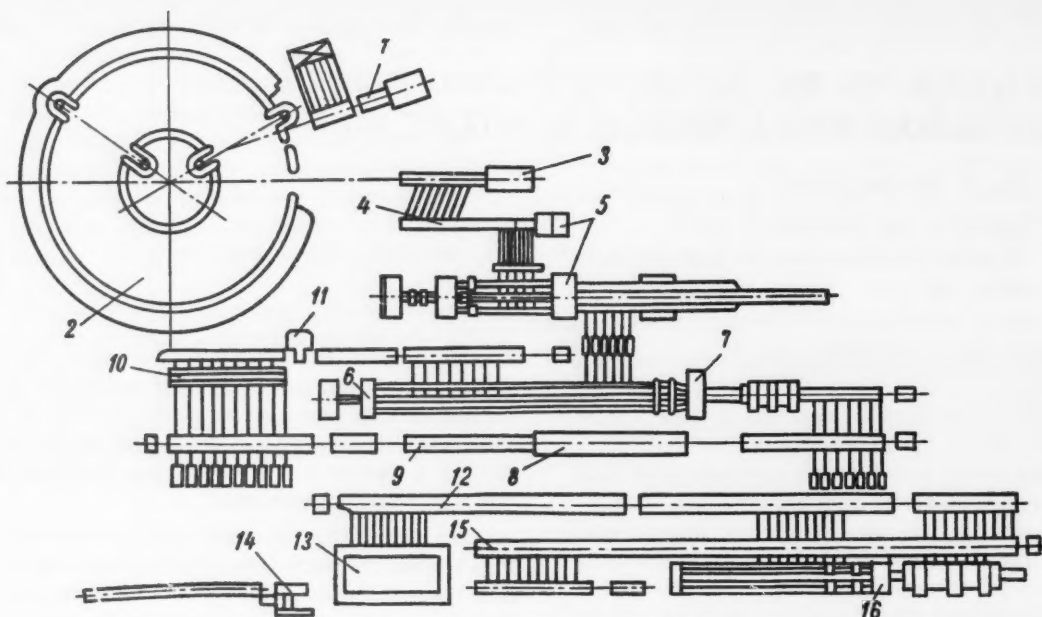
Arrangement of equipment with a three-high rolling mill: 1) closing machine; 2) annular furnace; 3) feeding machine; 4) roller table; 5) pneumatic centering device; 6) piercing mill; 7) rolling mill; 8) mandrel extractor; 9) roller table for mandrels; 10) bath for cooling mandrels; 11) lubricating machine; 12) roller table before furnace; 13) preheating furnace; 14) ejector; 15) runout table; 16) sizing mill.
